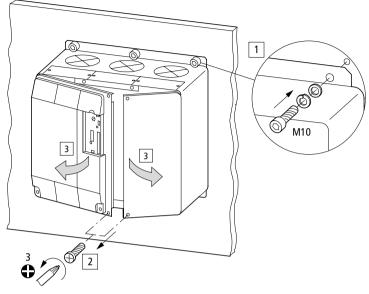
Installation on mounting plate, DM 4-340-250K to DM 4-340-500K
